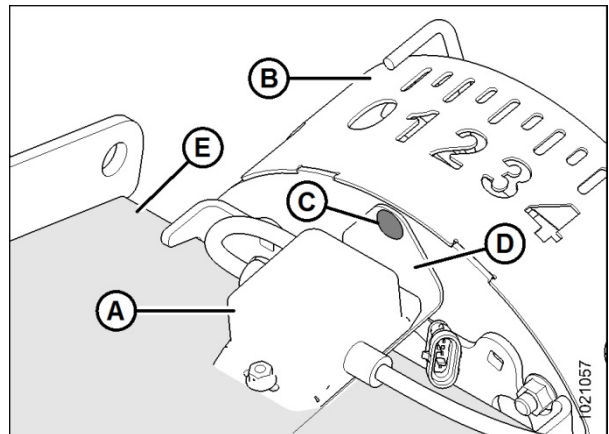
10V Adapter Assembly Attached to Float Indicator Box
